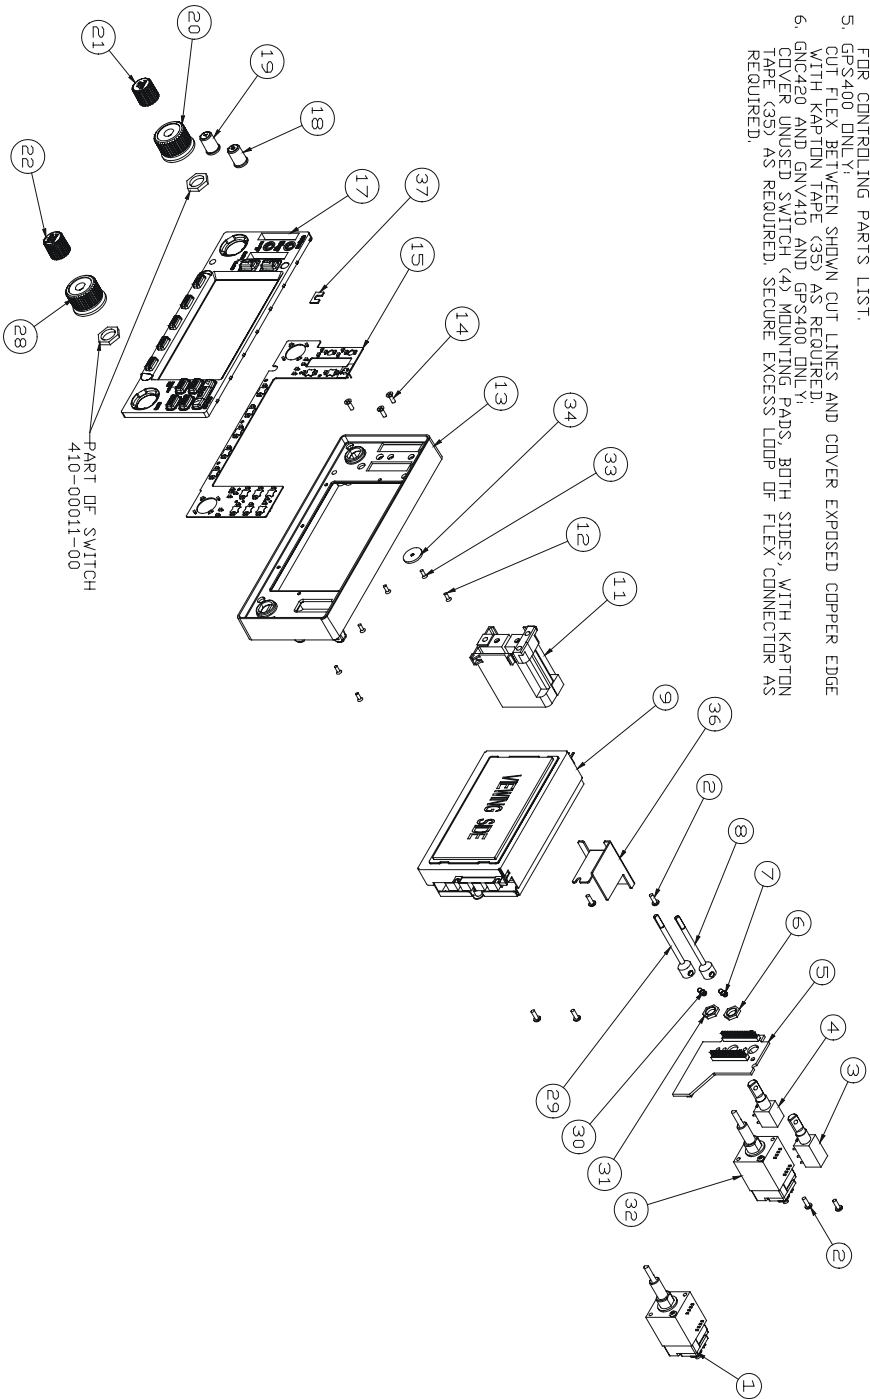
GNC 4XX CDU Assy (Sheet 1 of 2) (Dwg. No. 015-00281-XX, Rev. F)
